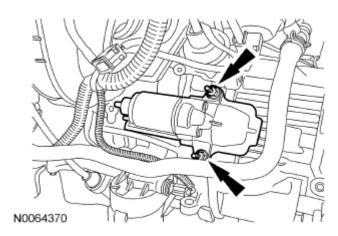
Locating Starter Stud Bolts Courtesy of FORD MOTOR CO.
